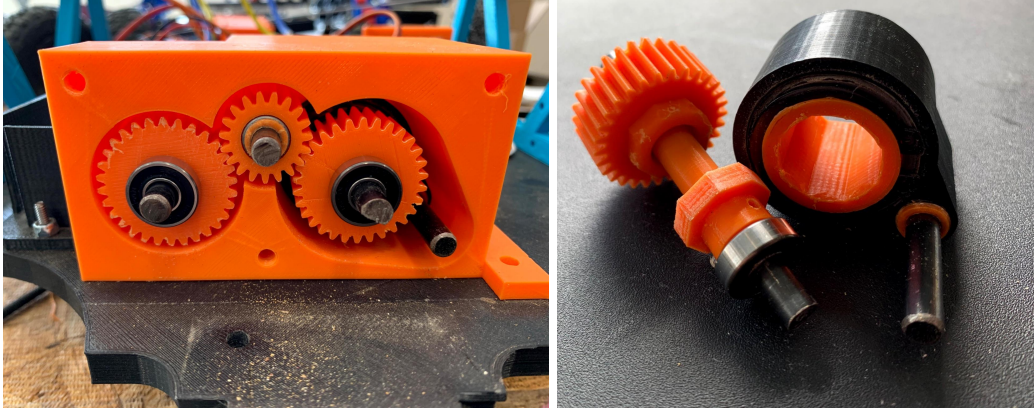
Manufactured Transfer Case Internals (Right Figure - Fully Assembled Transfer Case with Gears Meshed Together, Left Figure - Grooved Sleeve Assembly and First Transfer Case Gear)
